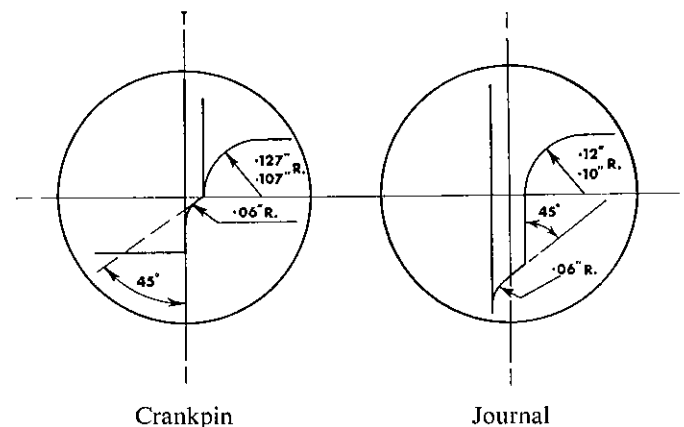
Showing chamfer and radii dimensions on Stage II crankshaft (Part No. 306549) which must be adhered to when crank grinding is undertaken
